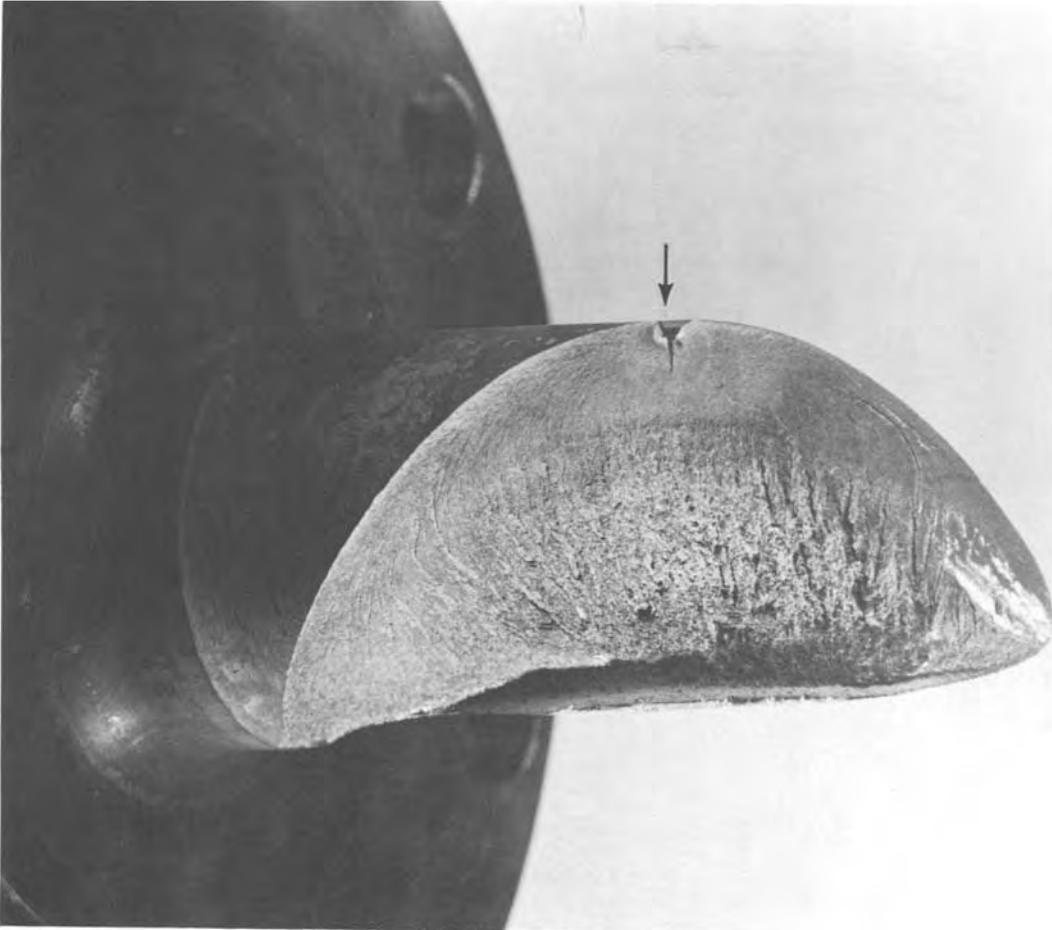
Torsional fatigue fracture of a 1050 steel axle shaft induction-hardened to about 50 HRC. The arrow indicates the longitudinal shear fatigue origin, which then changed direction and grew to the small circular beachmark, or "halo." Final brittle fracture (note chevron marks in case) caused complete separation with the characteristic 45° brittle fracture in torsion.
